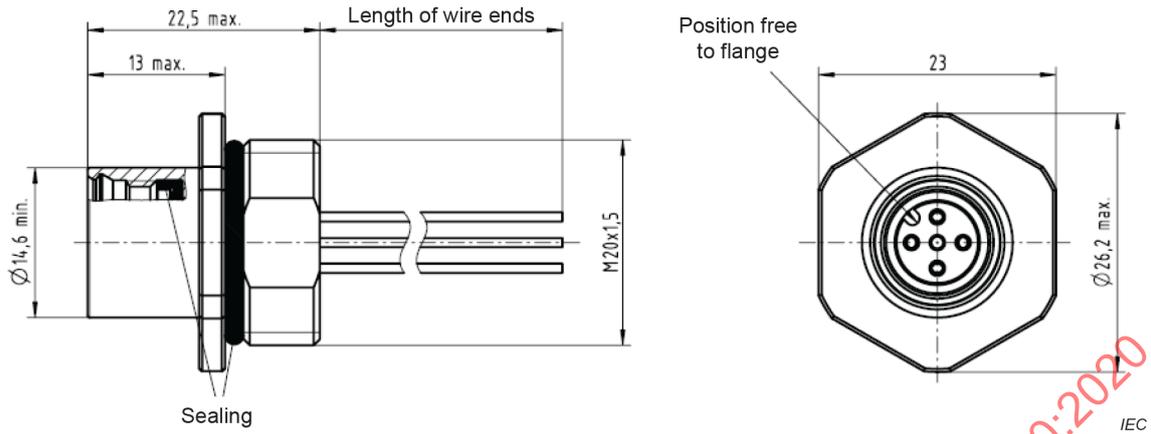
Fixed connector, female contacts, mounting with thread M12 × 1 and inner push-pull locking, with wire ends, single hole front mounting thread M20 × 1,5
